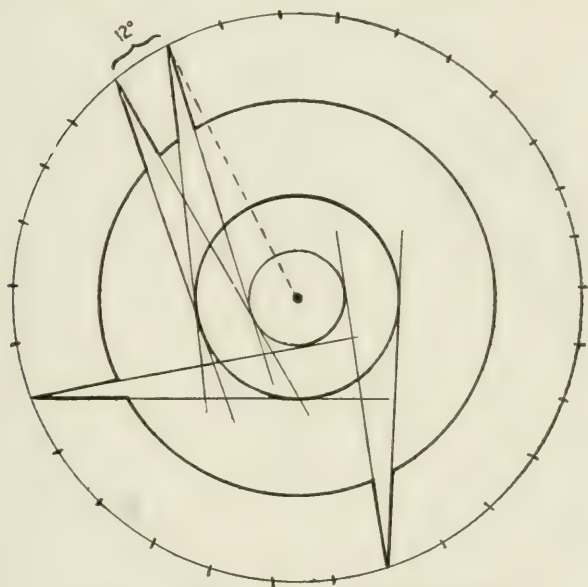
LAYING OUT AN ESCAPE WHEEL.
